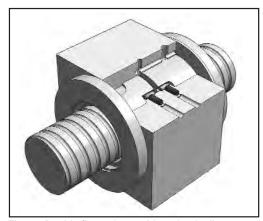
Double flanged nut with preload adjustment, outward facing flanges
